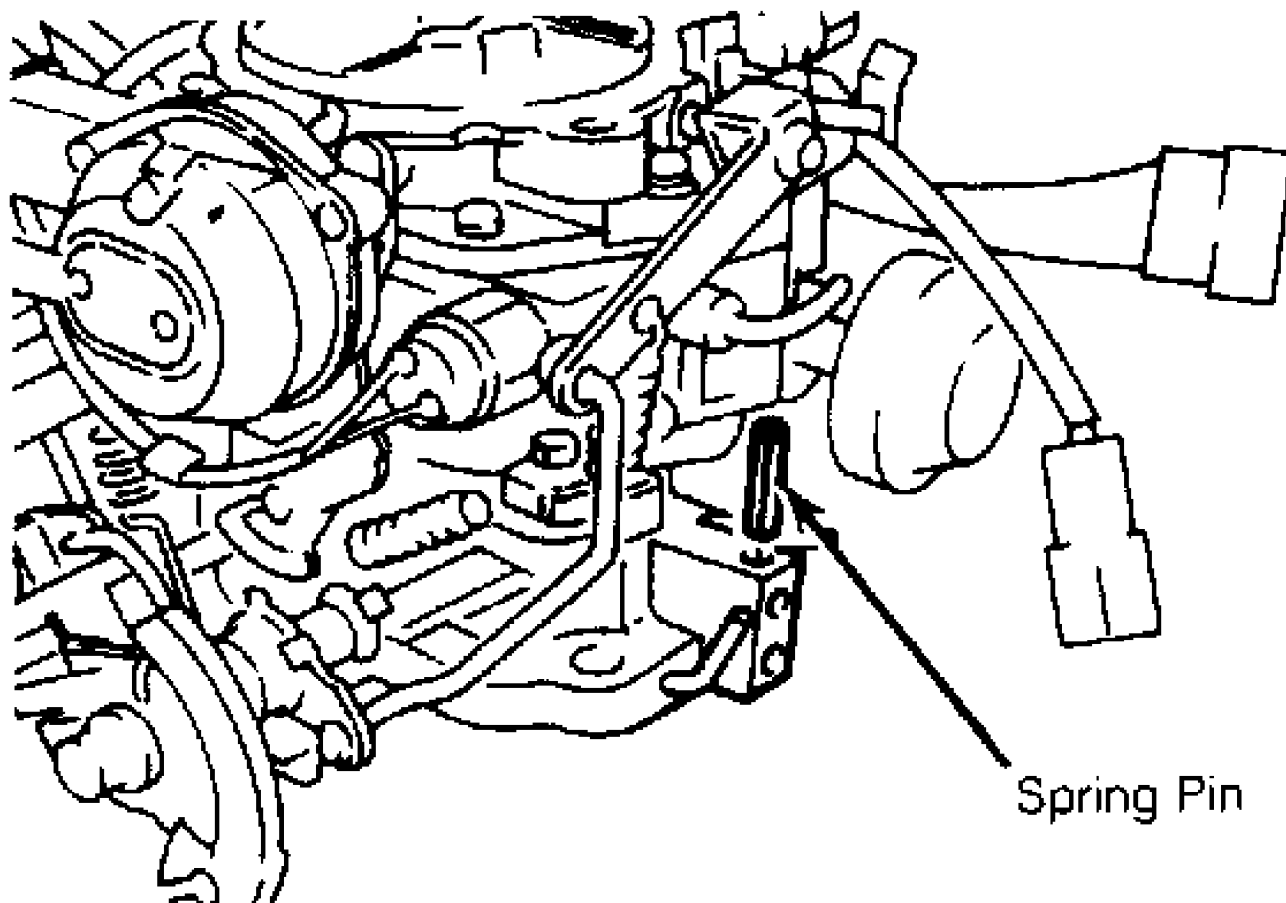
B2200 Carbureted Removing Carburetor Mixture Screw Roll Pin
